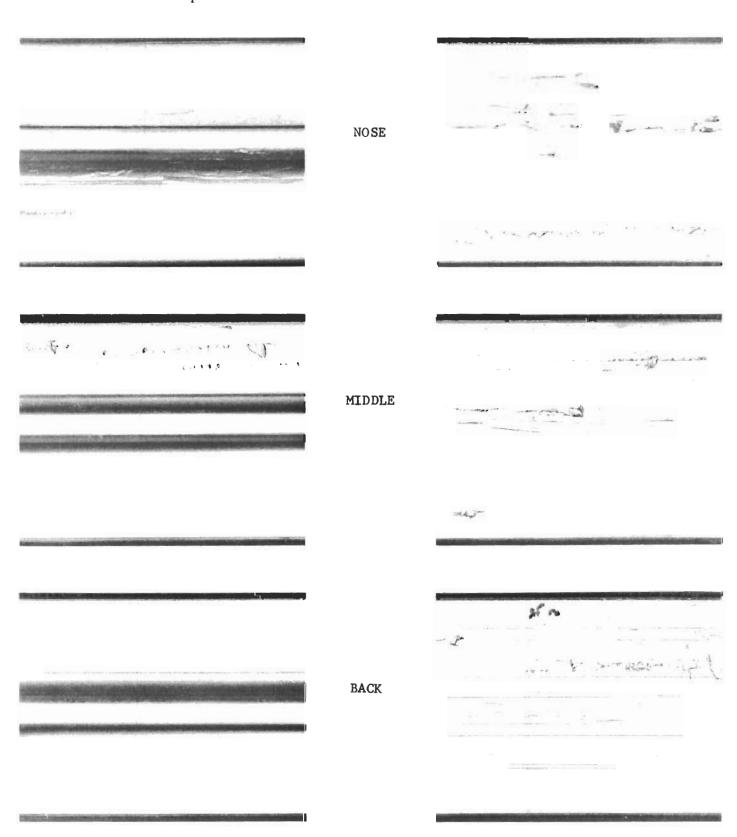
As-Extruded Surface of Arc Cast Tungsten-3 Percent Molybdenum Extrusion 36 (Billet Code W29)
